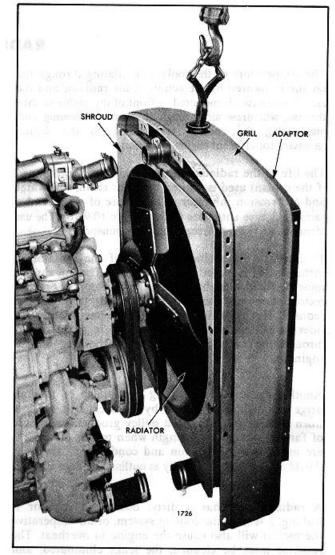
Removing Radiator, Shell and Shroud with Lifting Hook (Typical)
